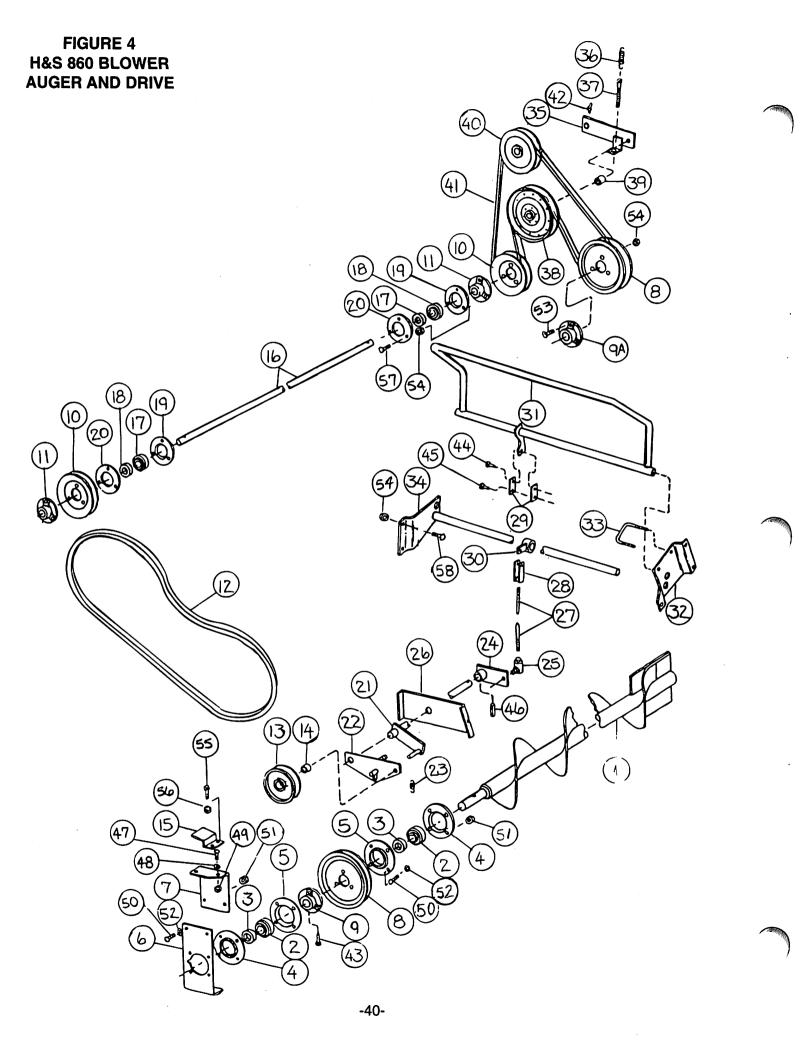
H&S 860 BLOWER AUGER AND DRIVE
